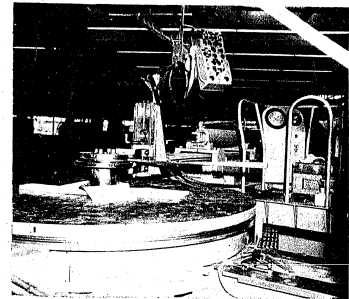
VIEW OF THE TOOLING MOUNTED IN A 25 TON BATH RADIAL DRAW FORMER.
